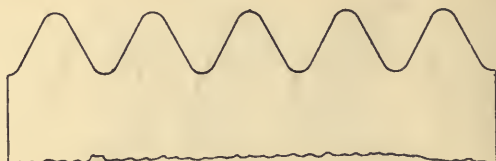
COMB SCREW-TOOL REQUIRED FOR CUTTING THE WHITWORTH THREAD.
